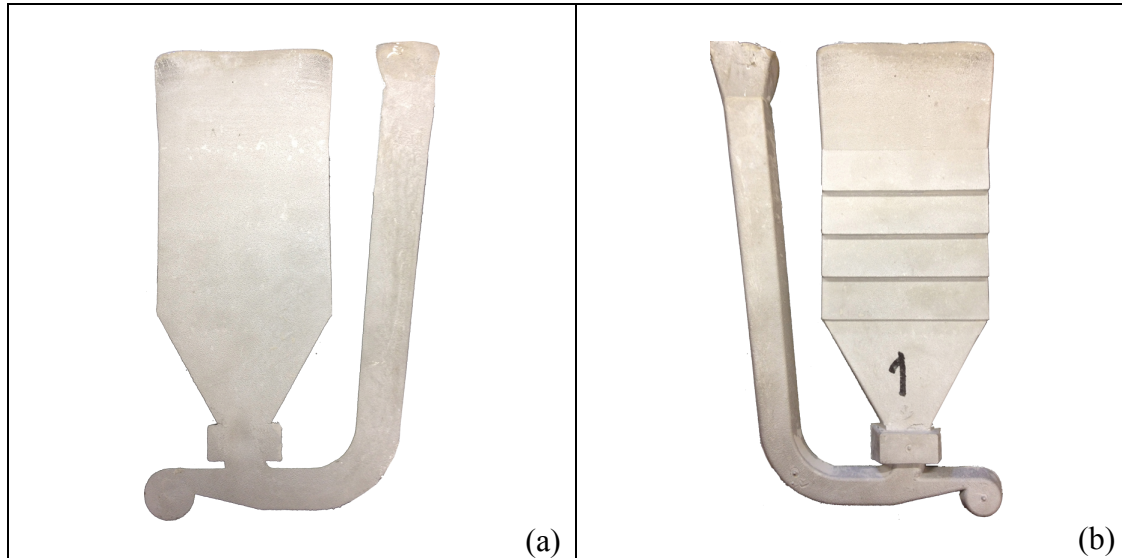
Example of a step casting produced with the optimised die: (a) back and (b) front views [38].
